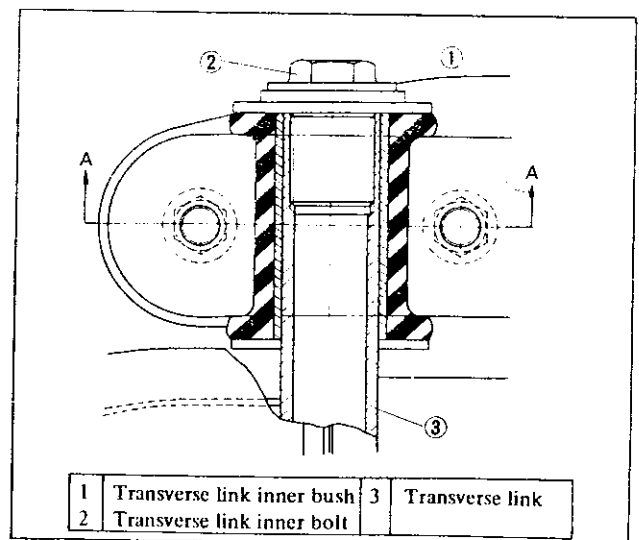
Cross sectional view of the transverse link inner bushing (1)
